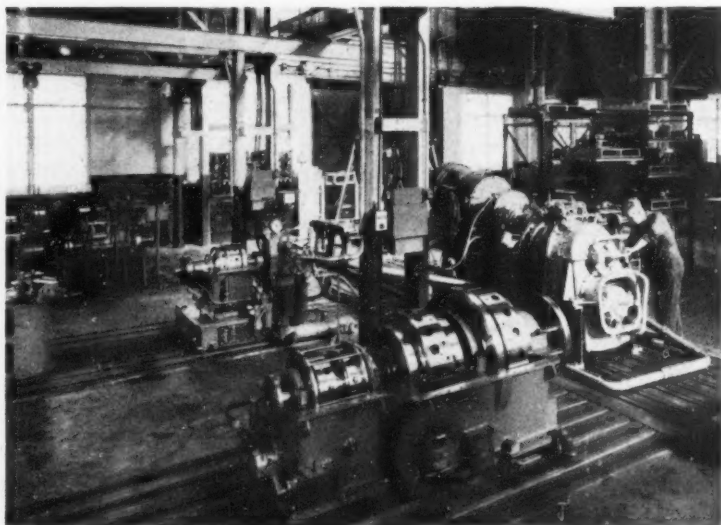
Some examples of Allen-Stoeckicht epicyclic gears may be seen in this general view of the test bay
